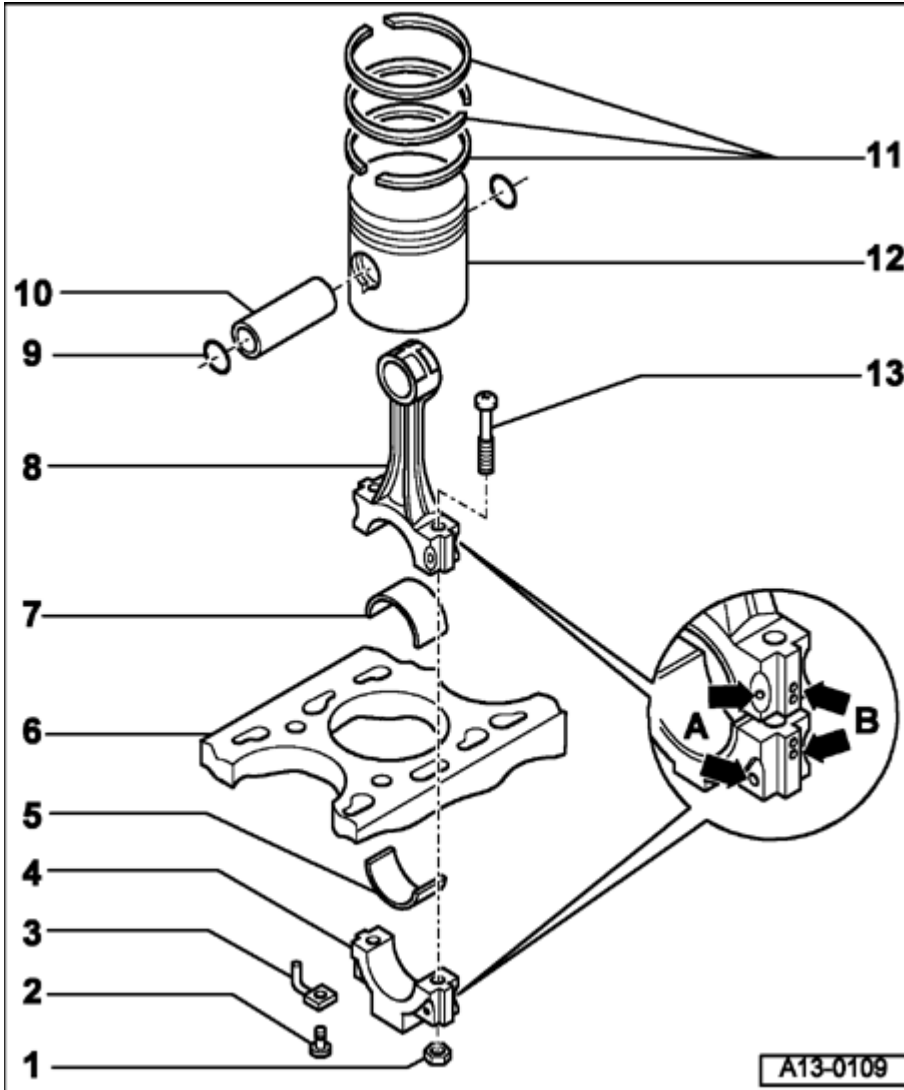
Pistons And Connecting Rods, Disassembling And Assembling Overview
